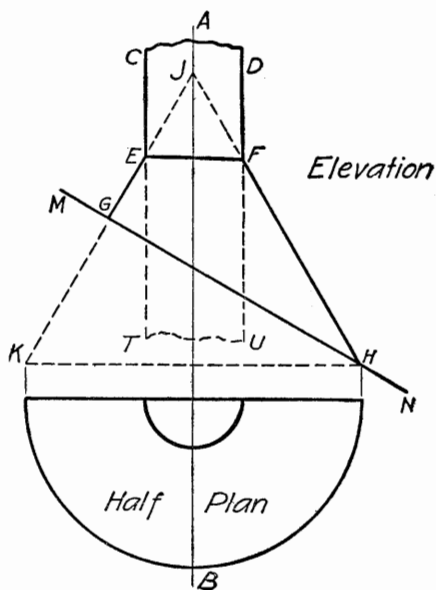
Half Plan and Elevation of a Flaring Roof Collar.
